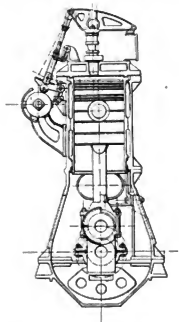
SECTIONAL DRAWING OF A 500-HORSEPOWER SABATHÉ MOTOR.
